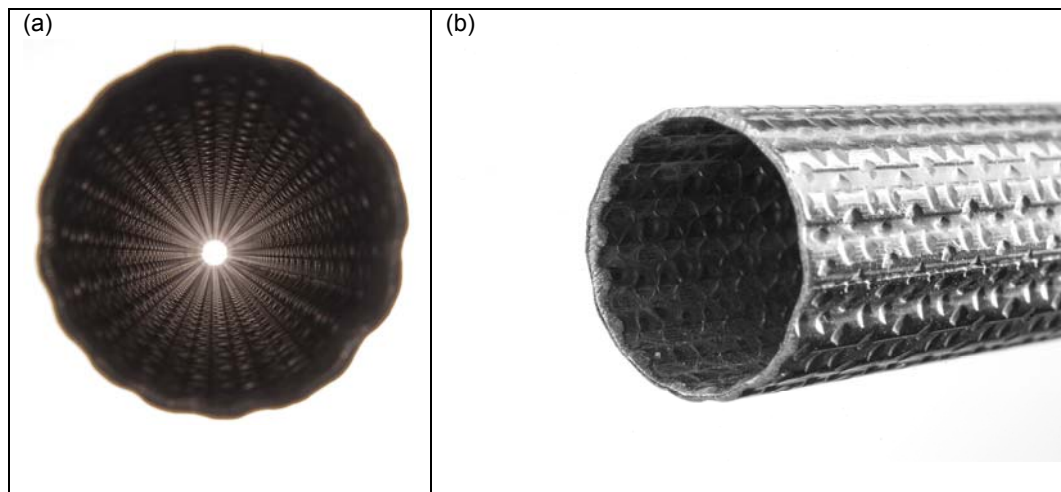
Details of the Vipertex 2EHT (Type 304 L stainless steel) Enhanced Tube (a) Cross sectional inner view (b) Outer surface.
